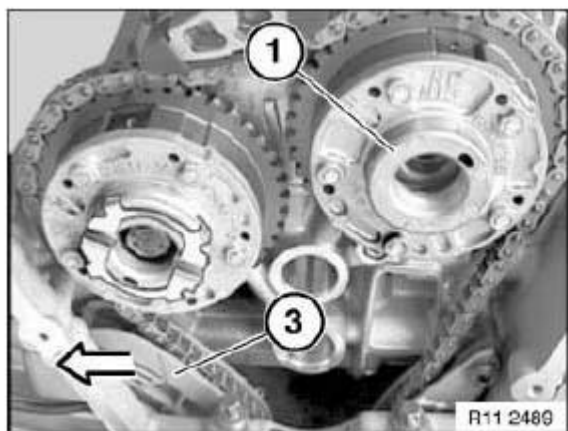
Identifying Back Tensioner Rail And Inlet Adjustment Unit
